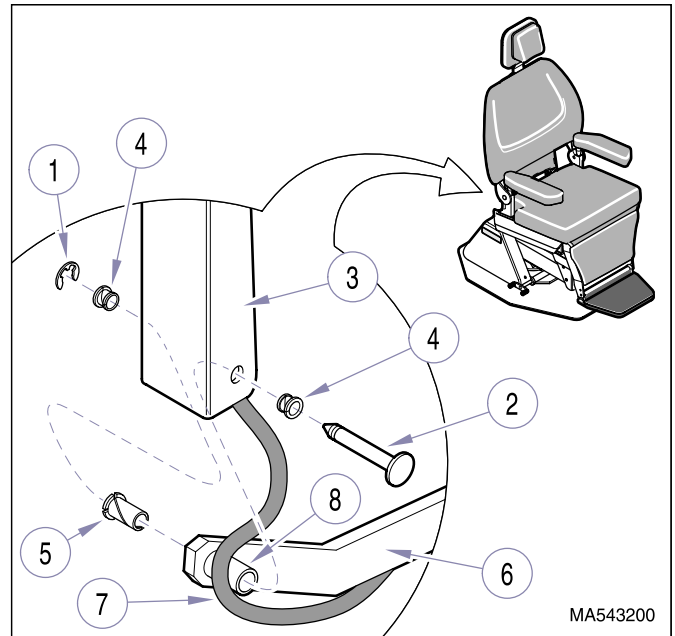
Back Section Pivot Bearings Removal / Installation
